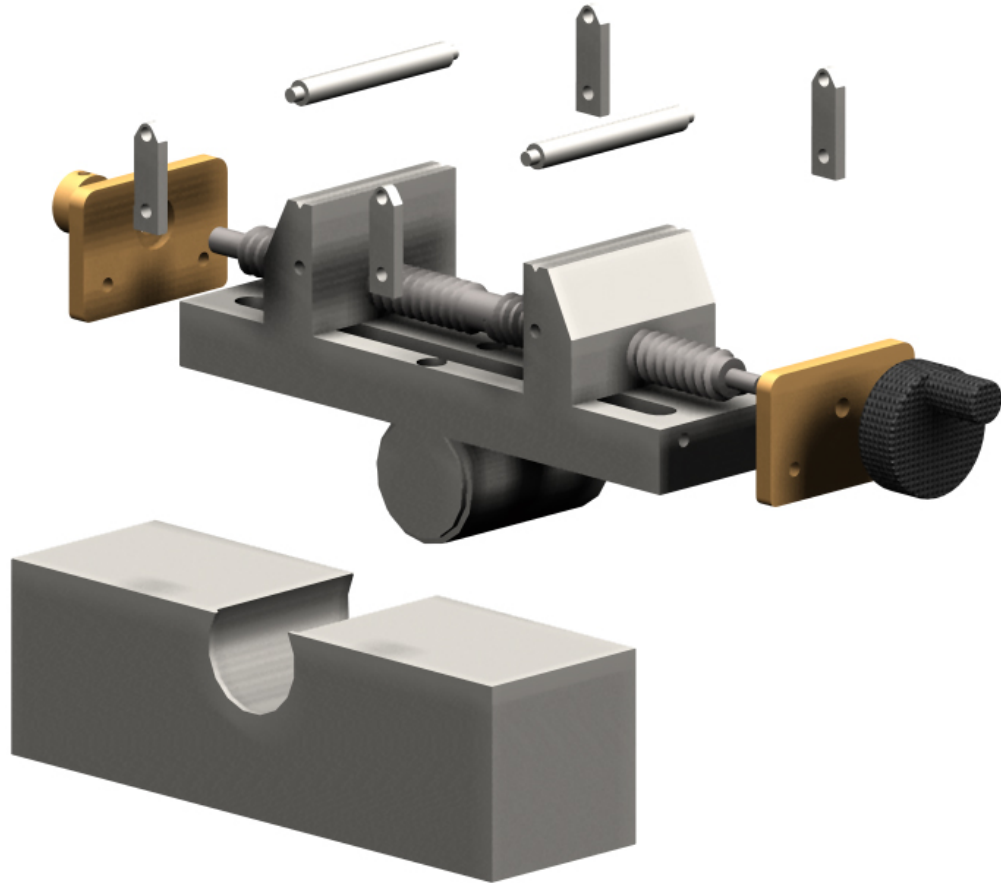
Adjustable flexural test rig, lower section exploded view. It can be utilised for both 3-point and 4-point flexural tests for samples greater than 50 mm in length.
